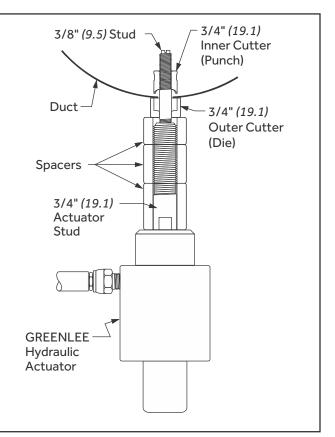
3/4" (19.1) Hydraulic Punch Configuration
